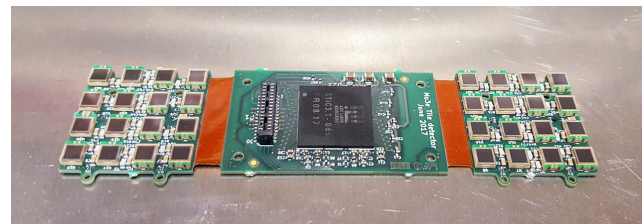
Tile matrix board assembled with SiPMs and a BGA packaged STiC 3.1 ASIC.
